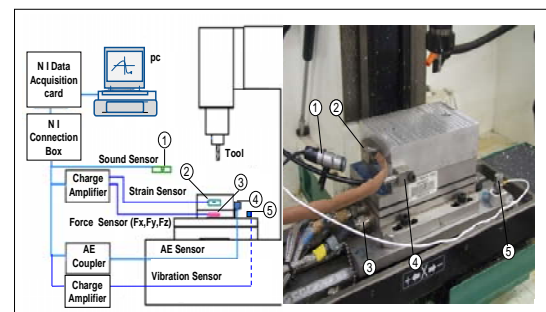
Schematic diagram of experimental setup for the monitoring system on milling machine.
